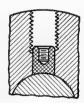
This shows another method of removing a plug, by first removing the clamping screw and then inserting a small screw to fit the tapped hole.
